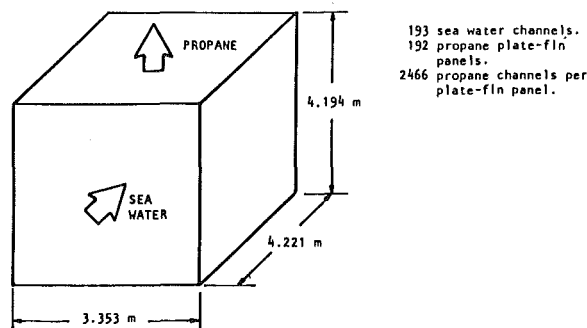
(a) Overall dimensions of a 1MWe module of the evaporator
